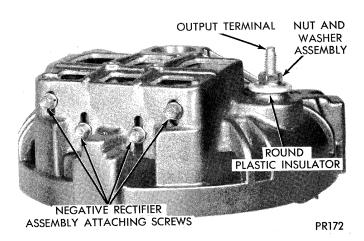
Removing Negative Rectifier Assembly and Output Terminal Nut
